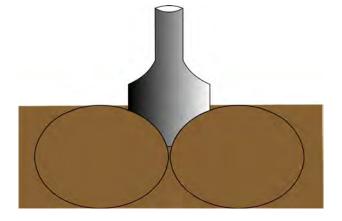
Step three: rounding out the other two parts of the block, using my tool n°. 2.
